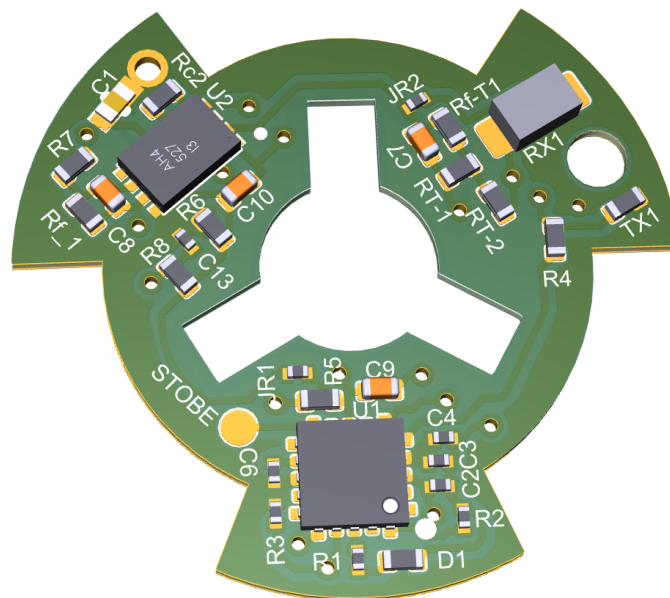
Top 3D view of version 2 PCB of OMP
